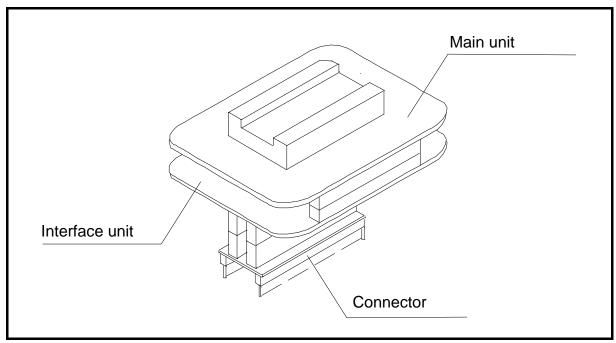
External view of the programming adapter (DIP type IC socket) and constituent parts
